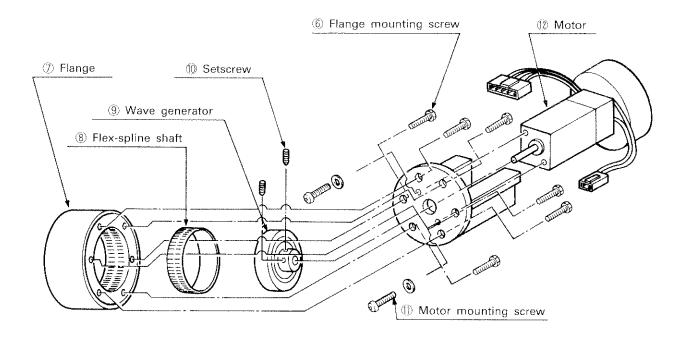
Replacing the Wrist Roll Drive Motor
